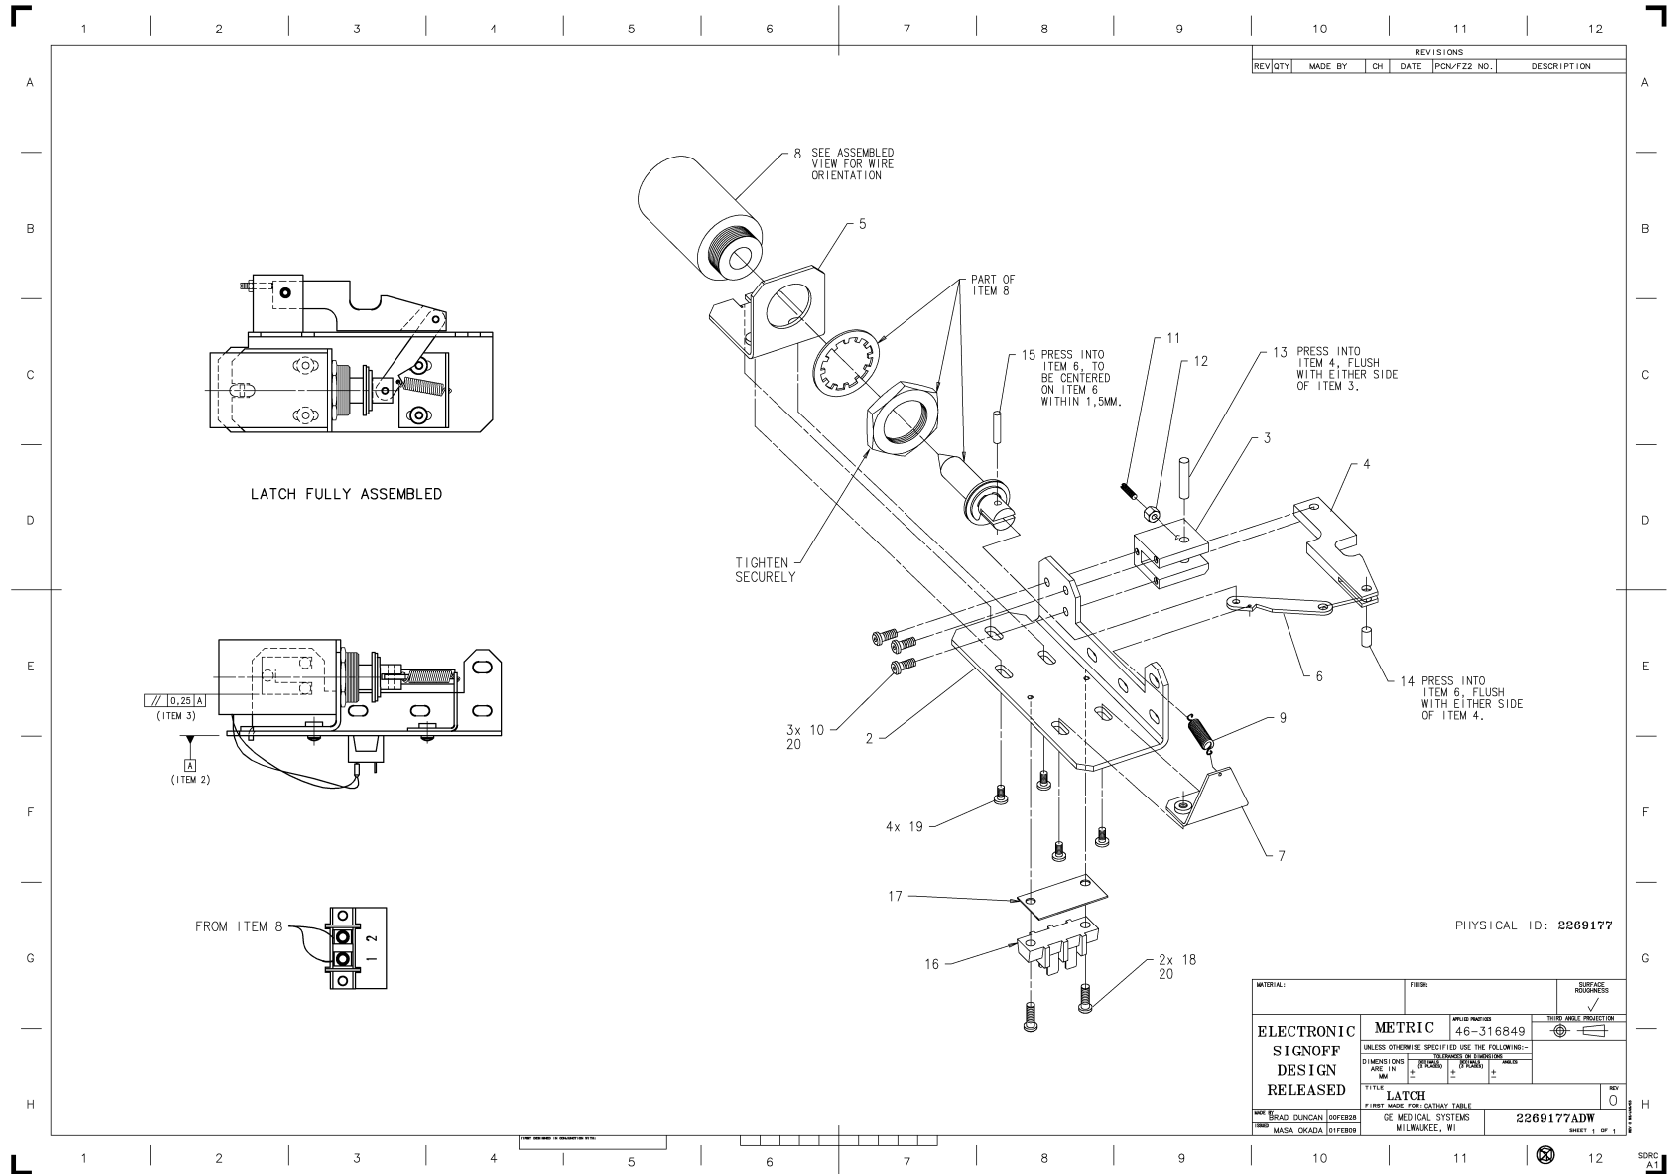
Latch Assembly (2269177, sheet 1, rev 0)
